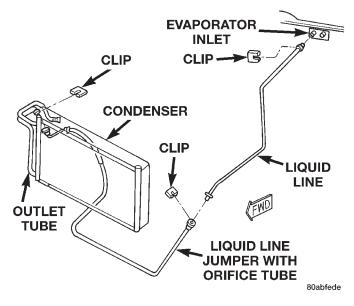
Liquid Line Remove/Install - Right-Hand Drive
